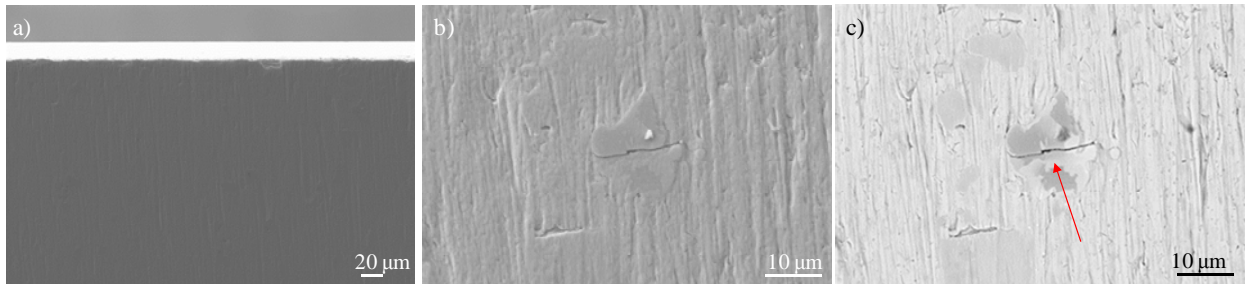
Images of the rake face of the UNIVERSAL lower tool at 5000 strokes: a) general overview; b) and c) crack observed at the surface in a primary carbide
